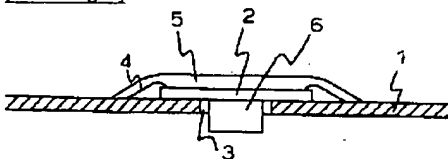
The sectional view showing the structure of the circuit board by this invention.
